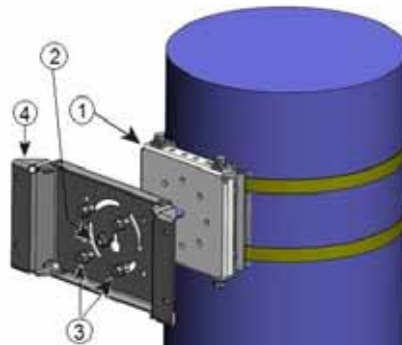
P-6: Cisco FAN Radio Repeater — Pole Installation — Attach Mounting Bracket
